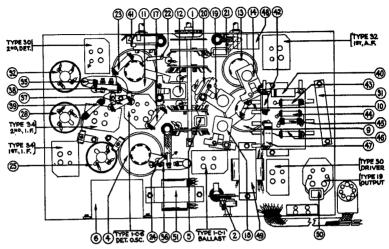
Bottom View of Chassis, Showing Parts, and Position of Compensating Condensers Reached from Below Chassis
